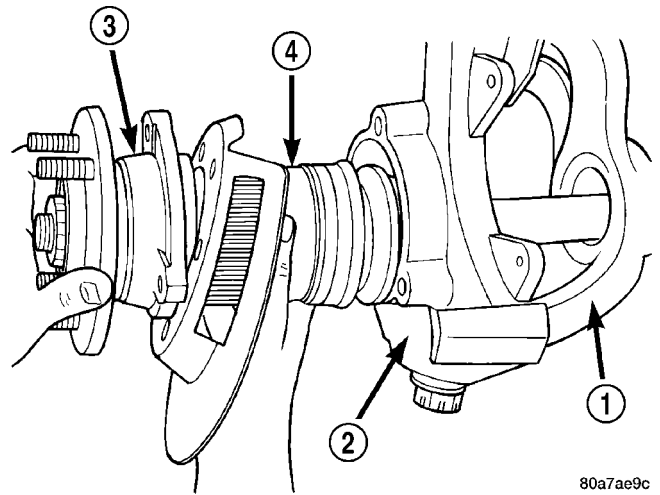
HUB BEARING AND AXLE ASSEMBLY
